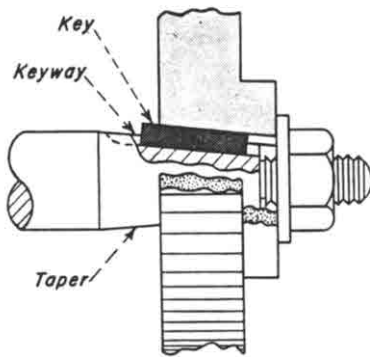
A tapered shaft with a key and threaded end is a rigid concentric assembly. It is suitable for heavy-duty applications, yet it can be easily disassembled.
